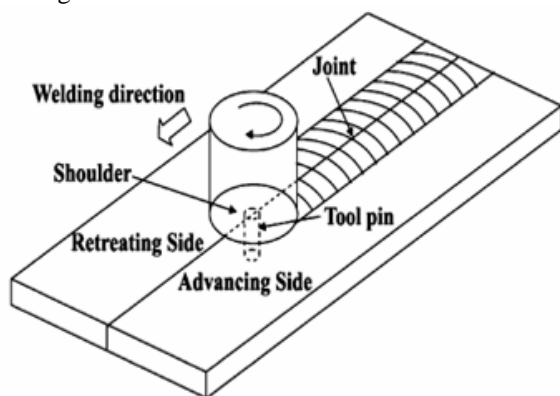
Schematic diagram shows friction stir welding process and terminology.
